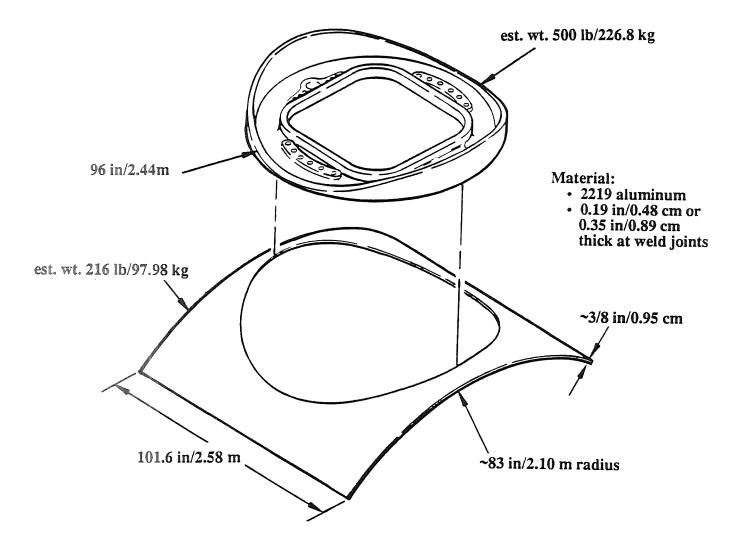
Node Radial Docking Port (Saddle Weld)
